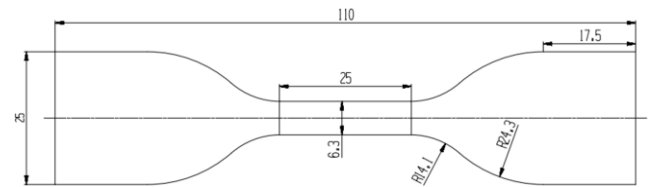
Rubber uniaxial tensile dumbbell-shaped specimen (Type I)
